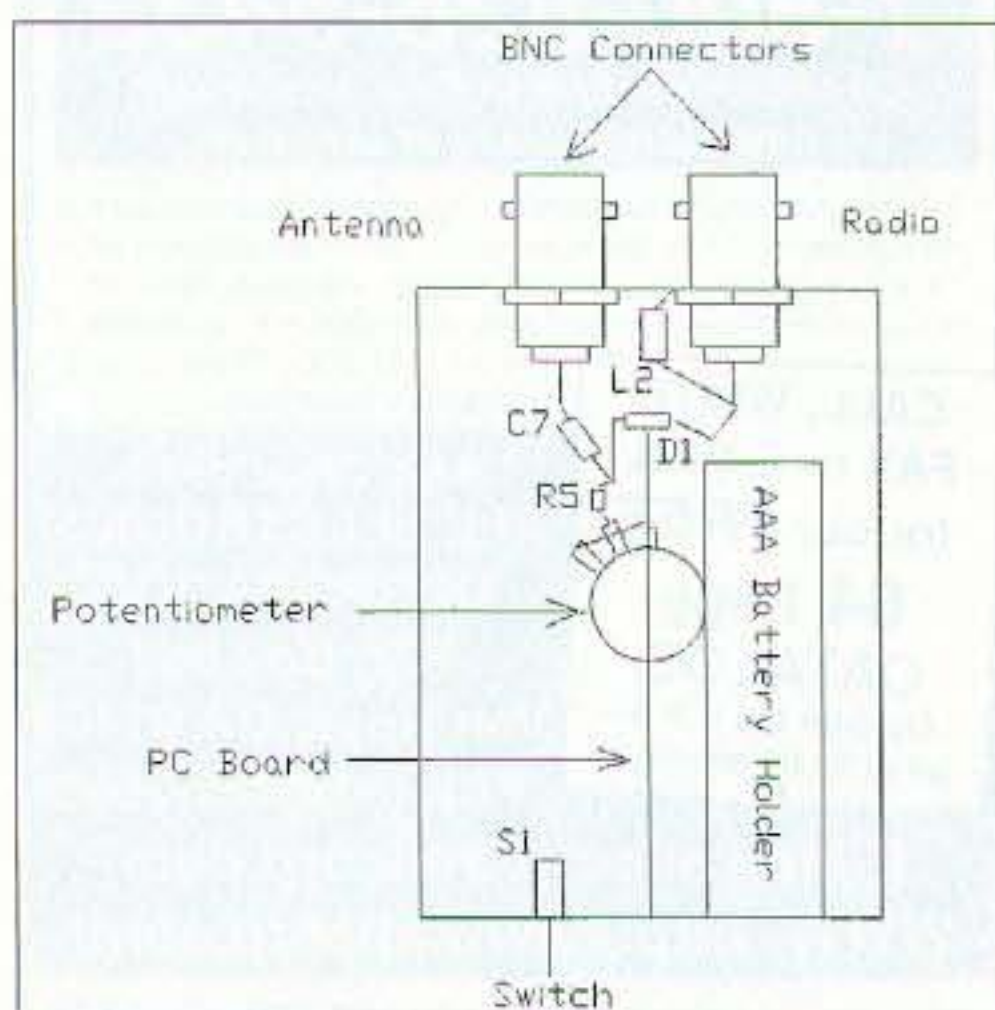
Attenuator parts layout of inside of box. The PC Board is shown in a vertical position.
